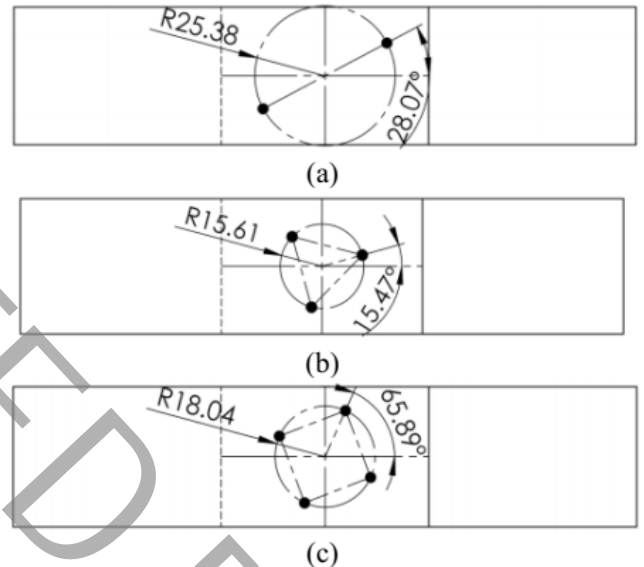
Optimal location (a) 2 spots welding (b) 3 spots welding (c) 4 spots welding
